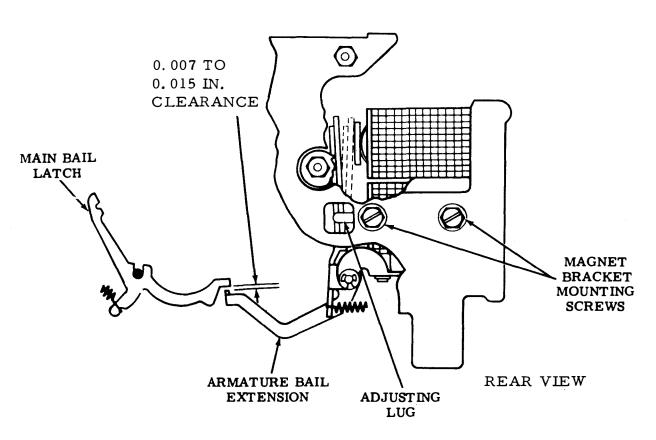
Clutch Magnet Assembly (Preliminary) (Main Bail Clearance)
